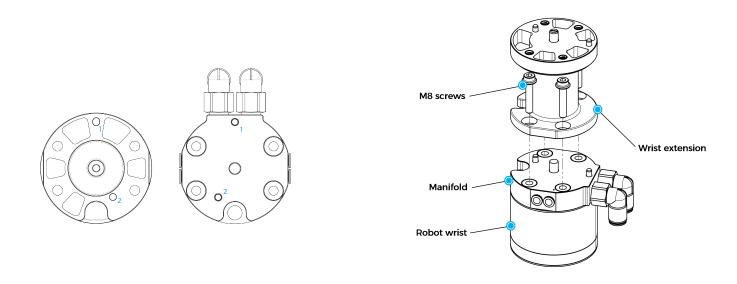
Installation of the Wrist Extension on the Manifold
